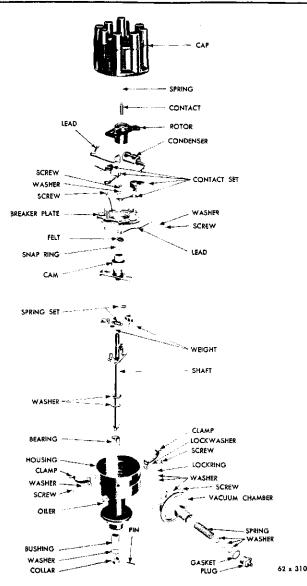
Distributor—Disassembled View (Auto-Lite)
